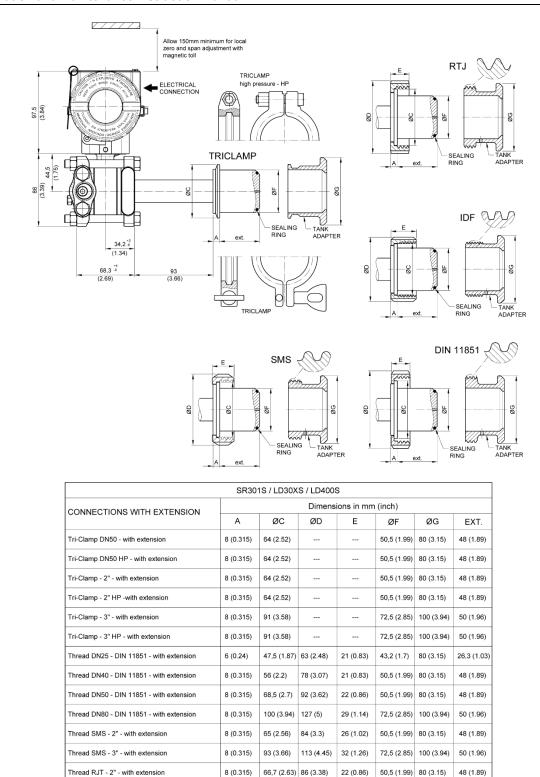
(e) - Dimensional Drawing and Mounting Position - Sanitary Transmitter with Extension
